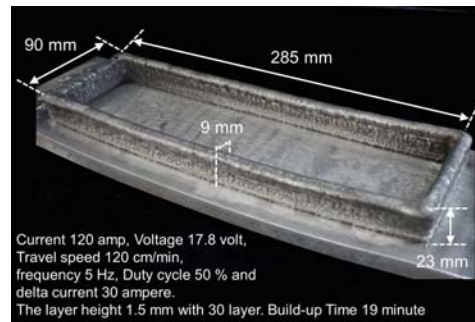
Workpiece by the suitable DP-GMAW parameters
